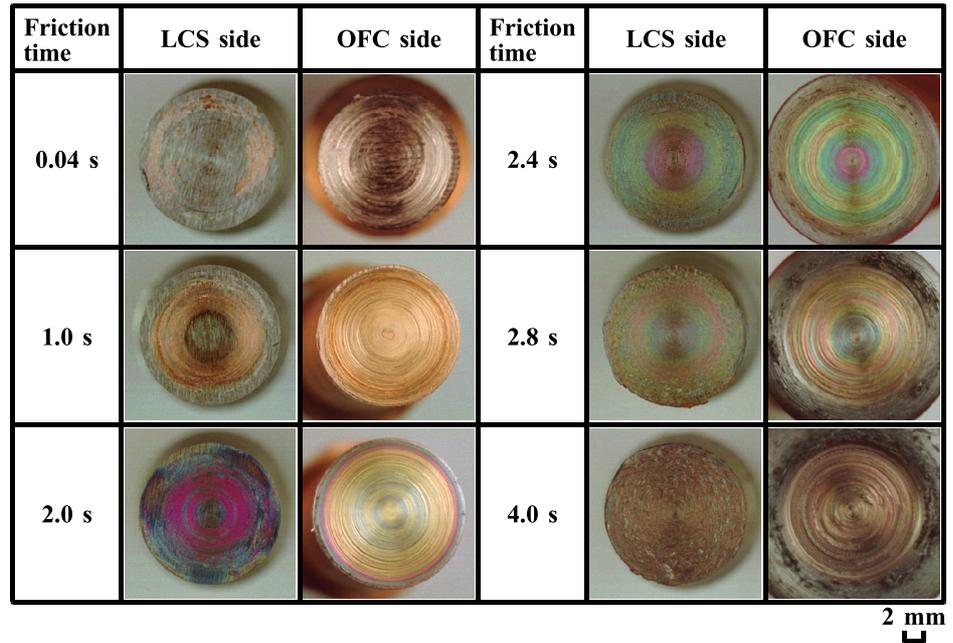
Appearances of weld interfaces after welding; friction pressure of 30 MPa.
